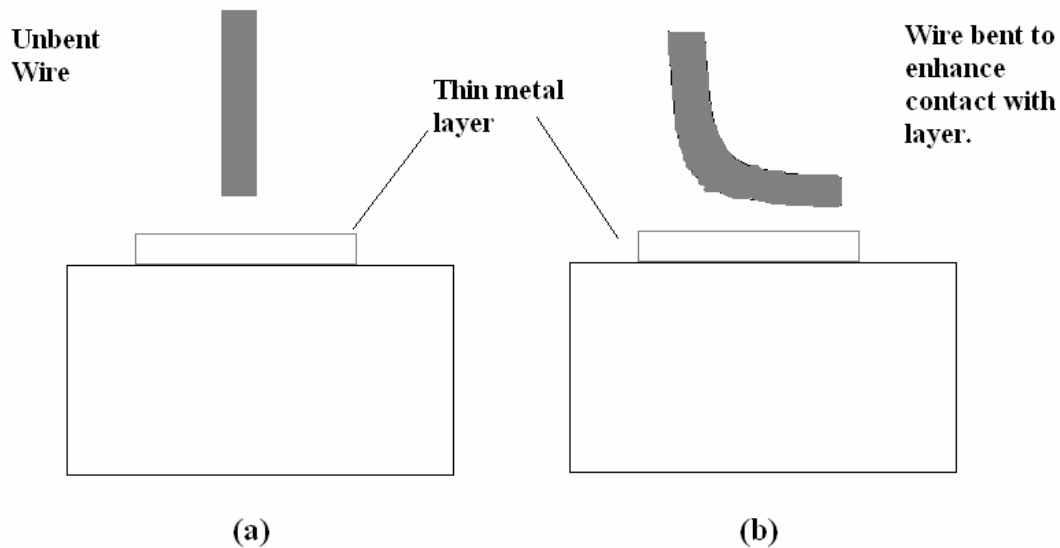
Two Methods of Resistance Arc Welding for Thin Film Thermocouples. (a) Using the Straight Wire. (b) Using Bent Wire.
